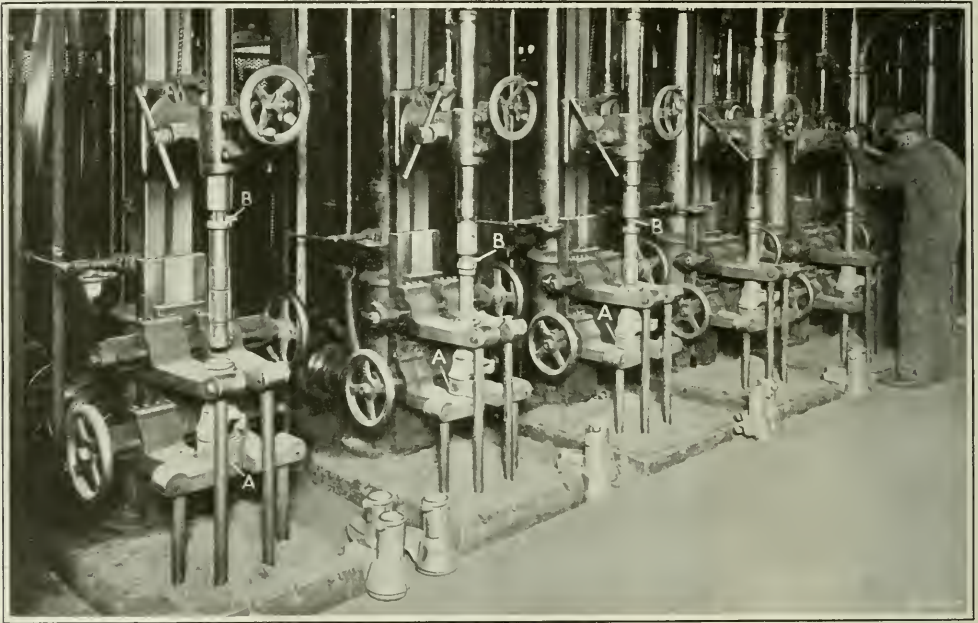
Battery of Drilling Machines with Special Equipment for boring and facing Pitcher Pump Cylinders
